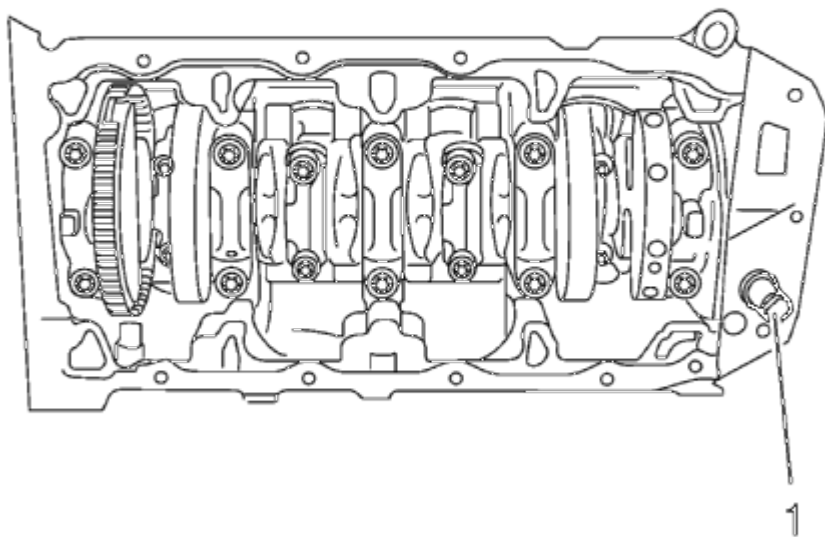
Oil Pressure Relief Valve Closure Bolt
